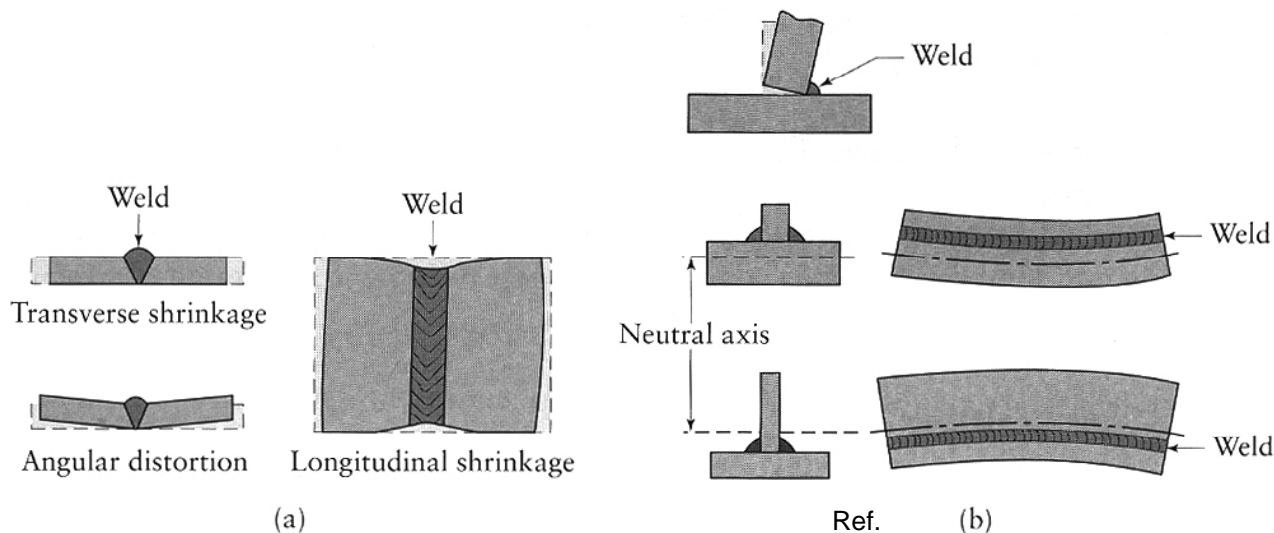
Distortion of parts after welding: (a) butt joints and (b) fillet welds. Distortion is caused by differential thermal expansion and contraction of different regions of the welded assembly. Warping can be reduced or eliminated by proper weld design and fixturing prior to welding.
